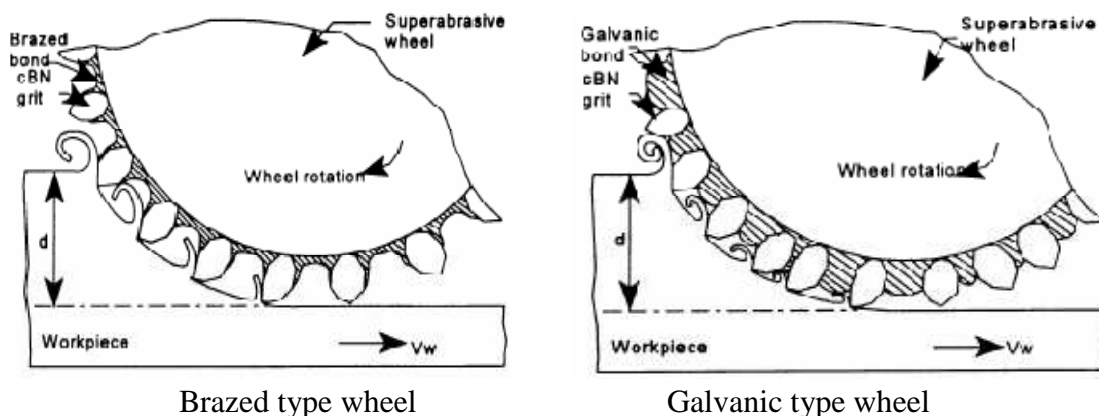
Comparison of brazed type and galvanic type bonded single layer CBN grinding wheel
